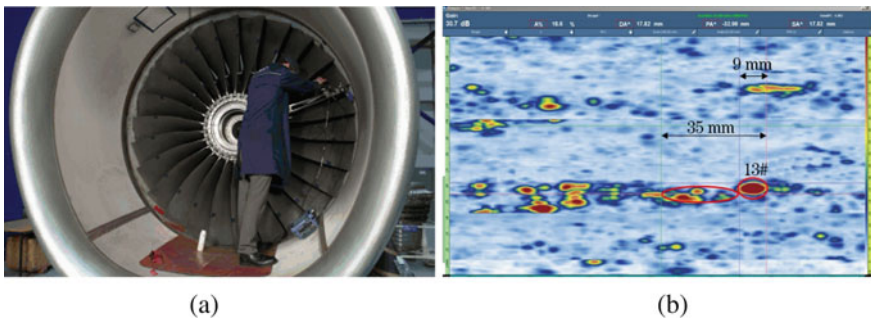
a Ultrasonic inspection of engine blades, b result of blade inspection
